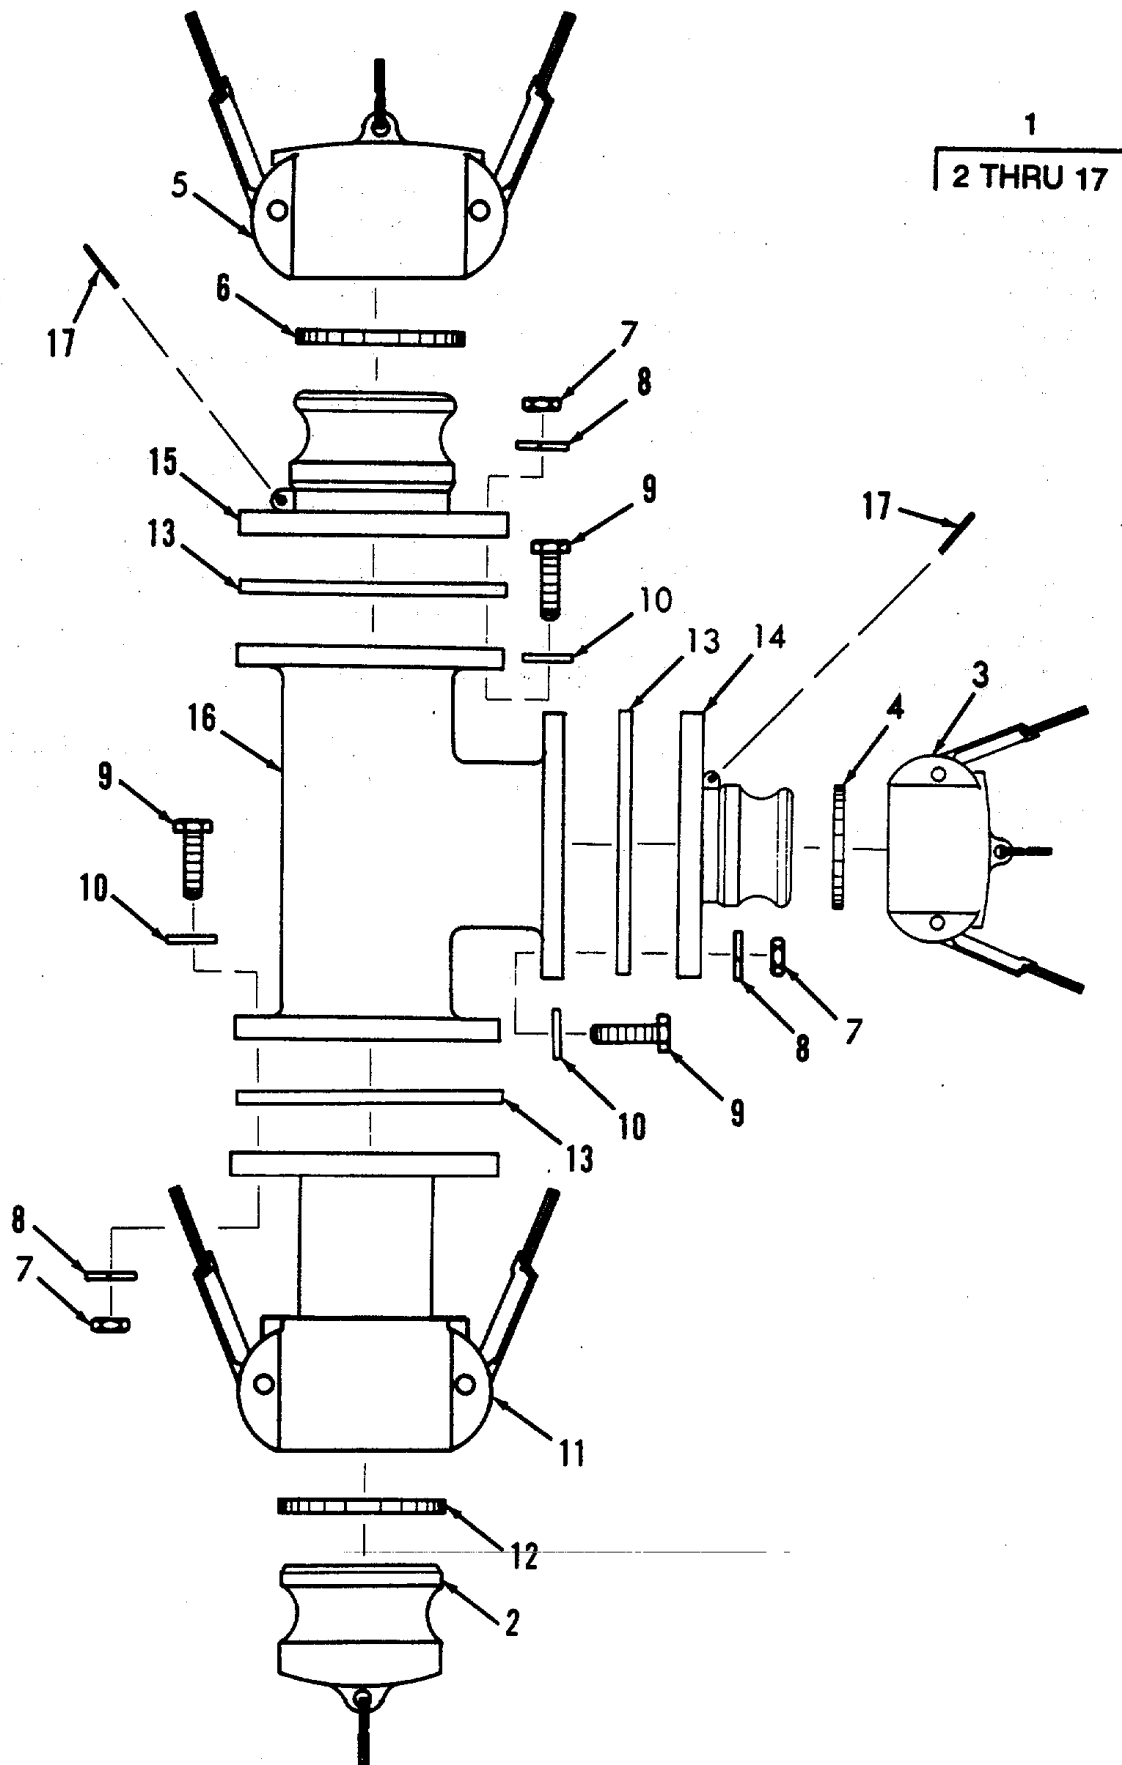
Tee Assembly, 3.00 in. x 3.00 in. x 2.00 in.
